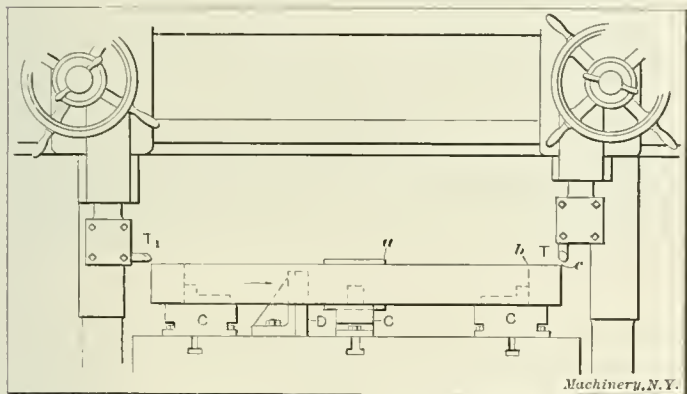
Double-headed Boring Mill arranged for Turning a Flywheel
